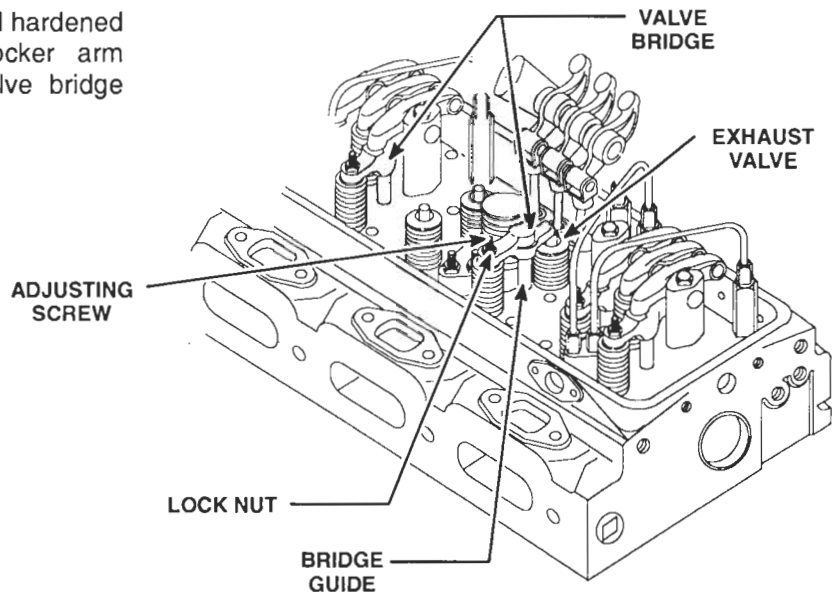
Location of Exhaust Valves and Guides Four-Valve Cylinder Head
